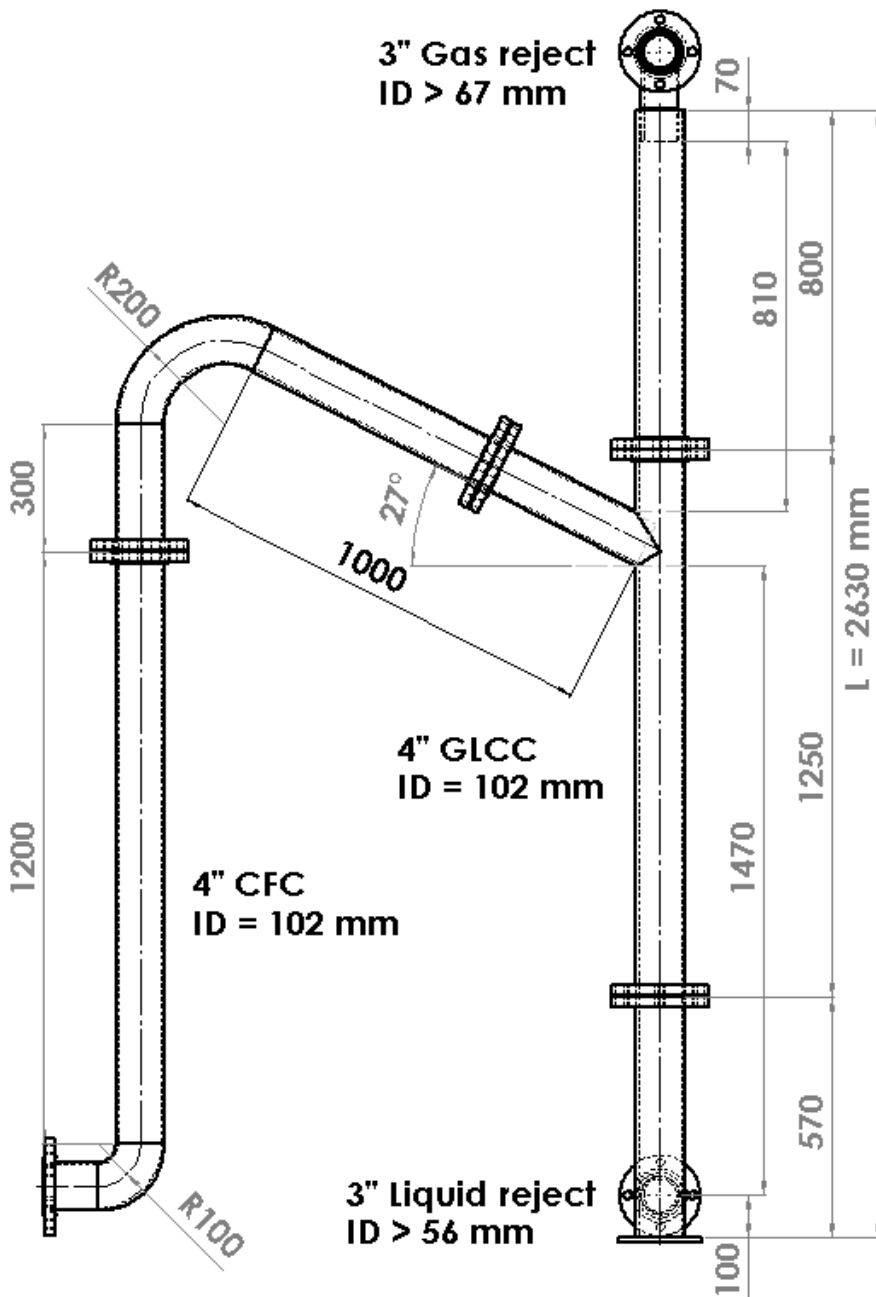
Second GLCC design and dimensions, including flanges for assembly, inlet and outlets.
